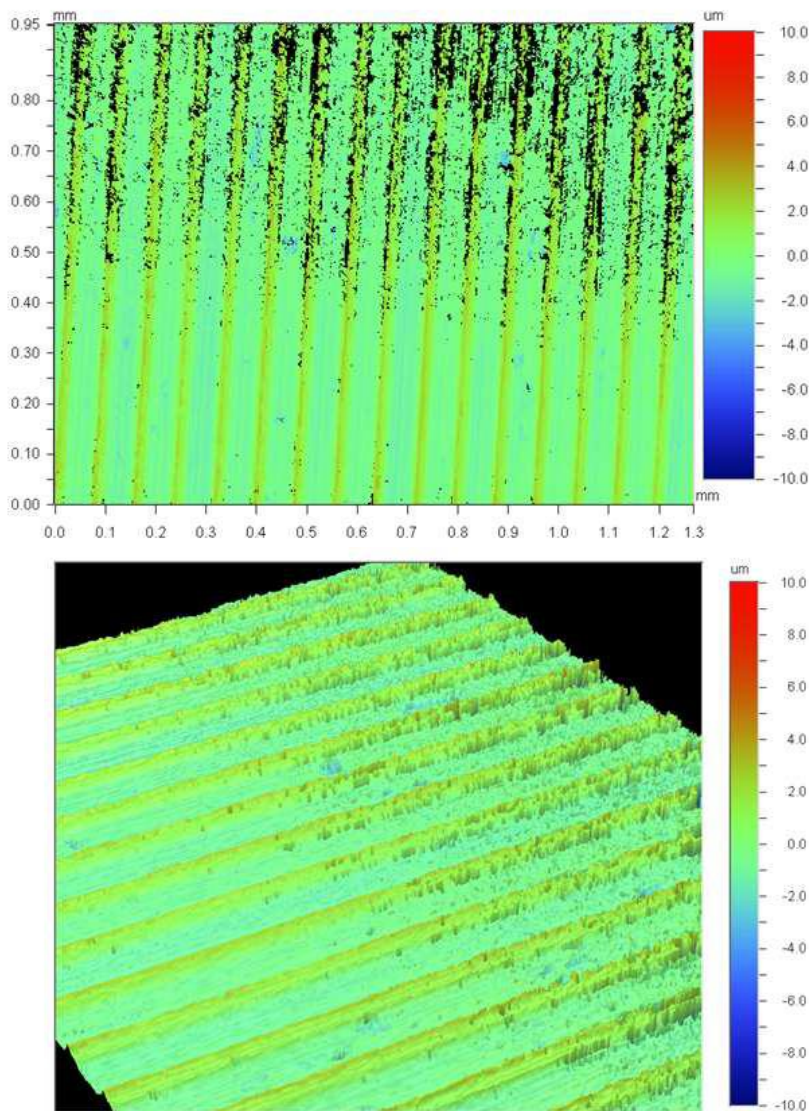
Surface Roughness on EN-8workpiece by 3 different Tool
